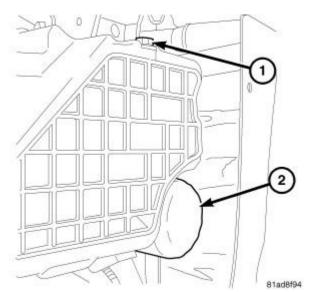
ENGINE OIL FILTER AND COOLER Courtesy of CHRYSLER LLC
